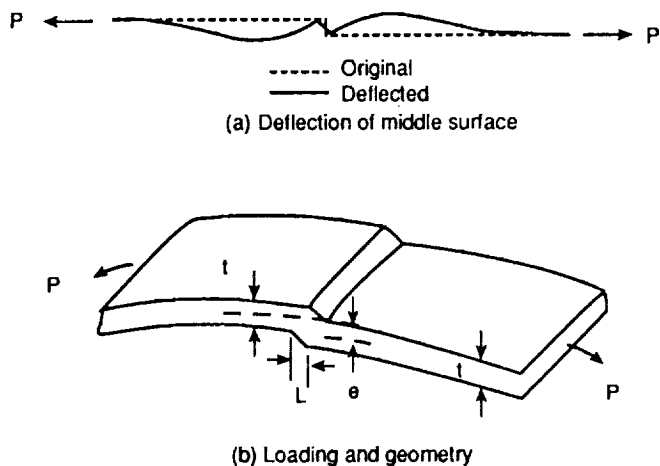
Weld offset of longitudinally welded cylindrical structures [5].
